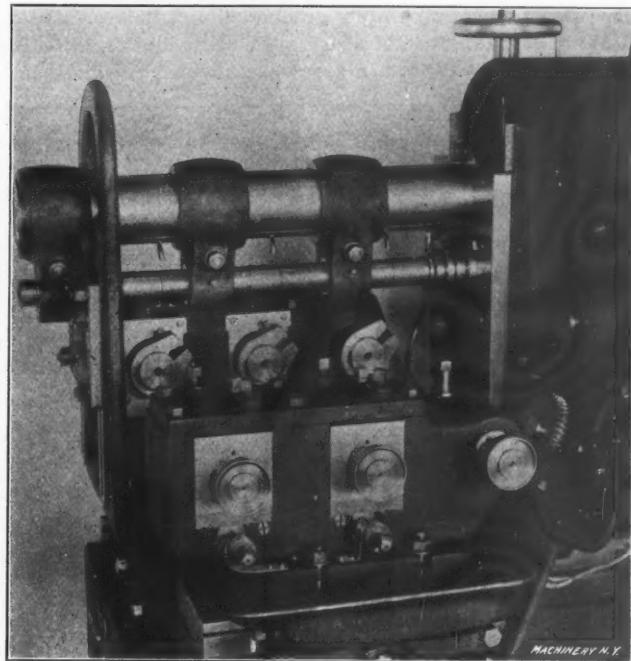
Index Milling Machine equipped with 3-spindle Centers
